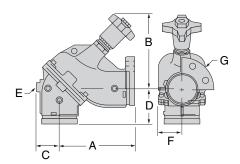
FIGURE GBV-A GROOVED-END ANGLE BALANCING VALVES DUCTILE IRON, GROOVED-END OR FLANGED-END ANGLE
